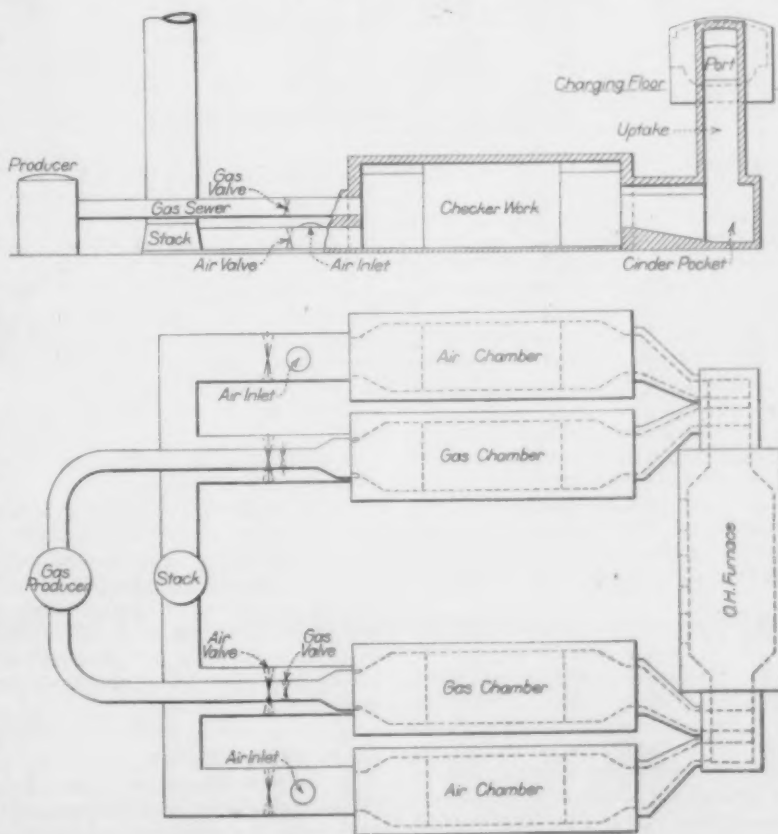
Plan and Elevation to Show Regenerator Chambers of Furnace
